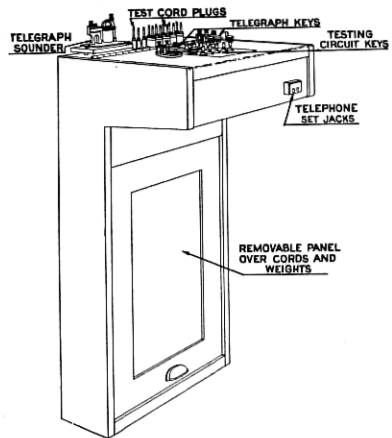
Typical Assembly for Keyshell Equipment Unit for Panel Mounted Test Board
